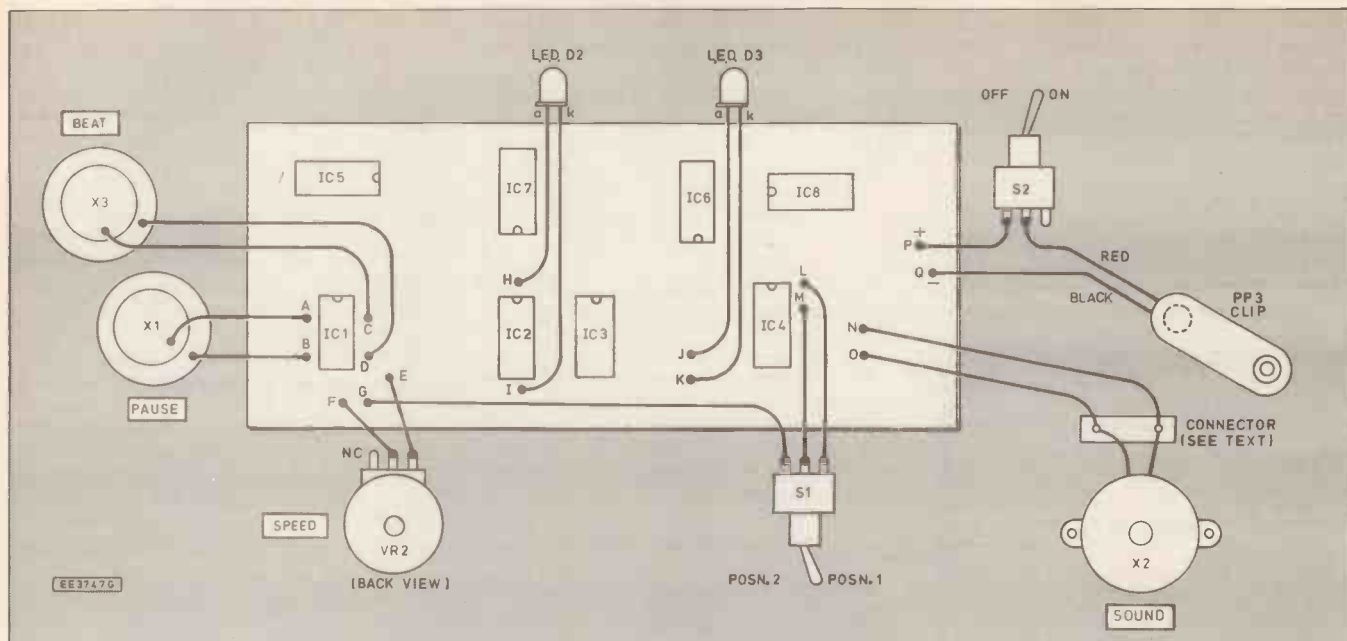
Interwiring from the printed circuit board to all off-board components.
